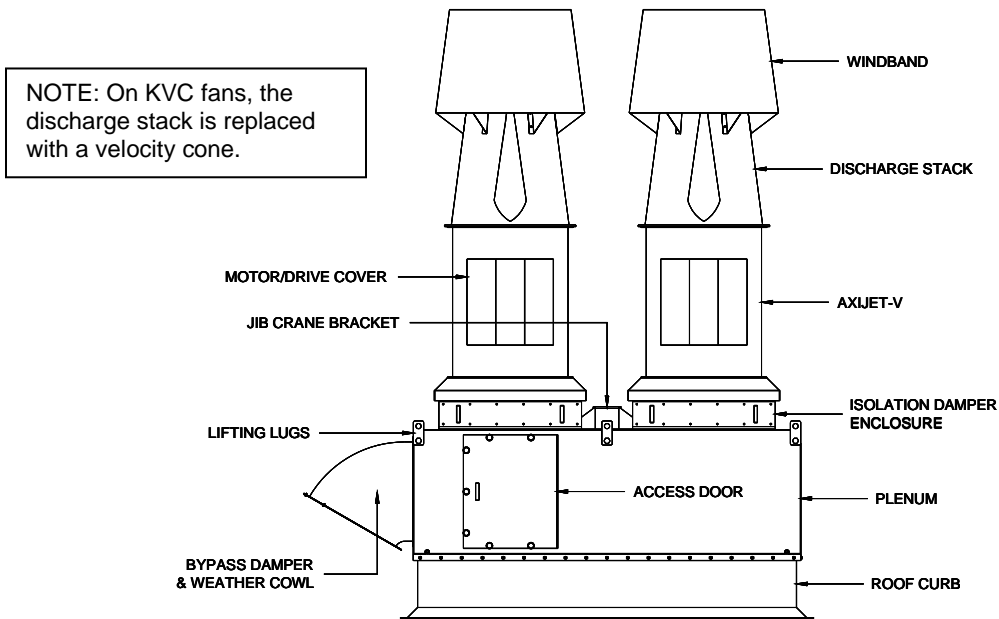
Axijet-V Fan & Plenum Assembly (KVC - Similar)
